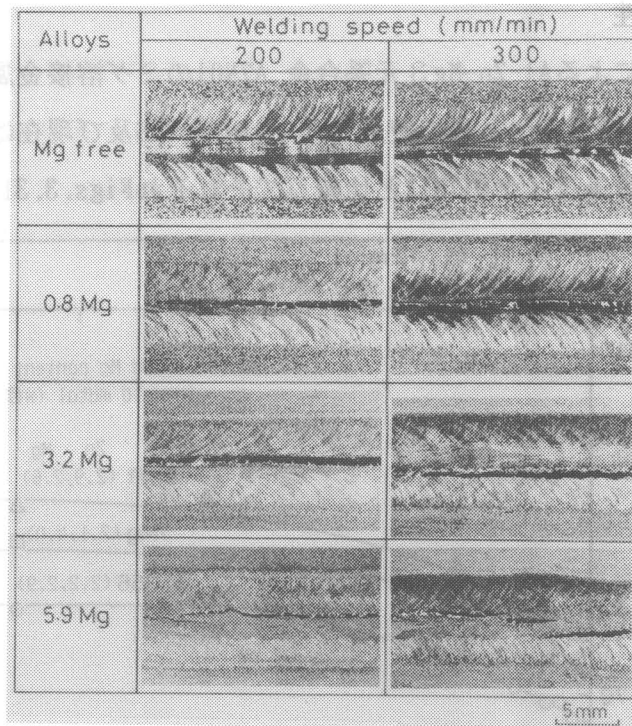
Macrostructures of weld bead surface of Houldcroft type test specimen of Al-2wt%Zn-Mg alloys with different Mg contents.
